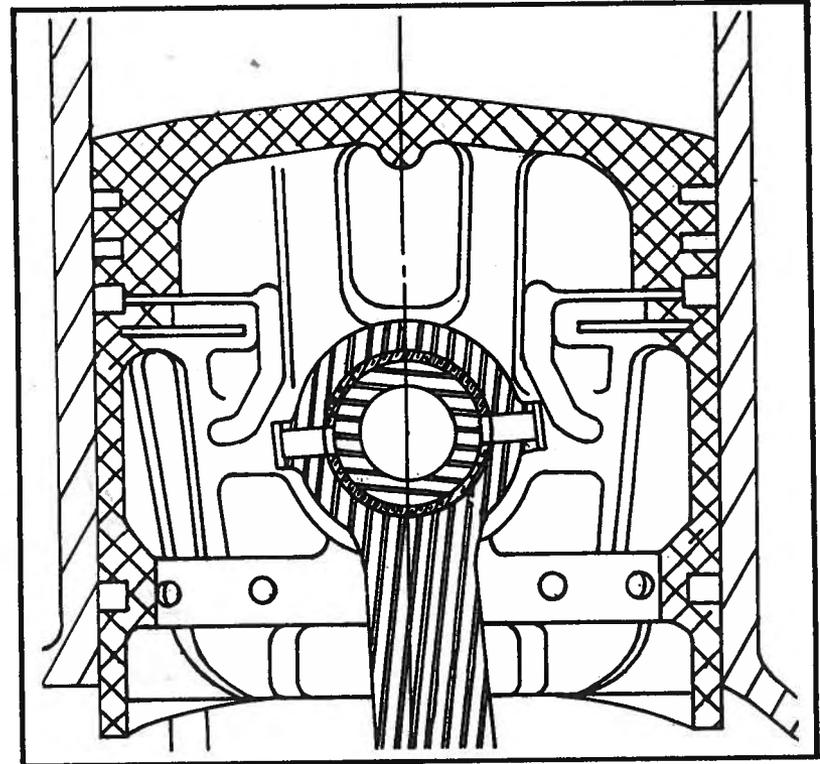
Sectional view of the stock Ford 59A piston.
